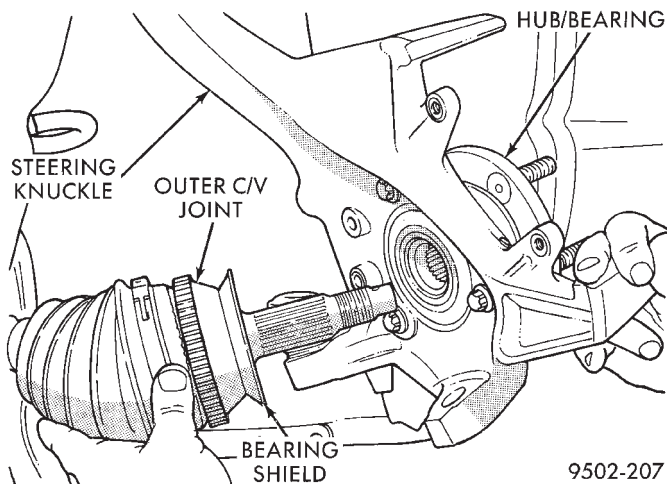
Separating Steering Knuckle From Outer C/V Joint
